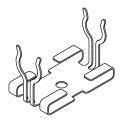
Mounting Clip (Secured with an M4 Screw or Cable Tie)
